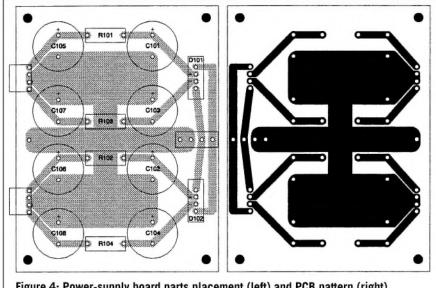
Power-supply board parts placement (left) and PCB pattern (right).
